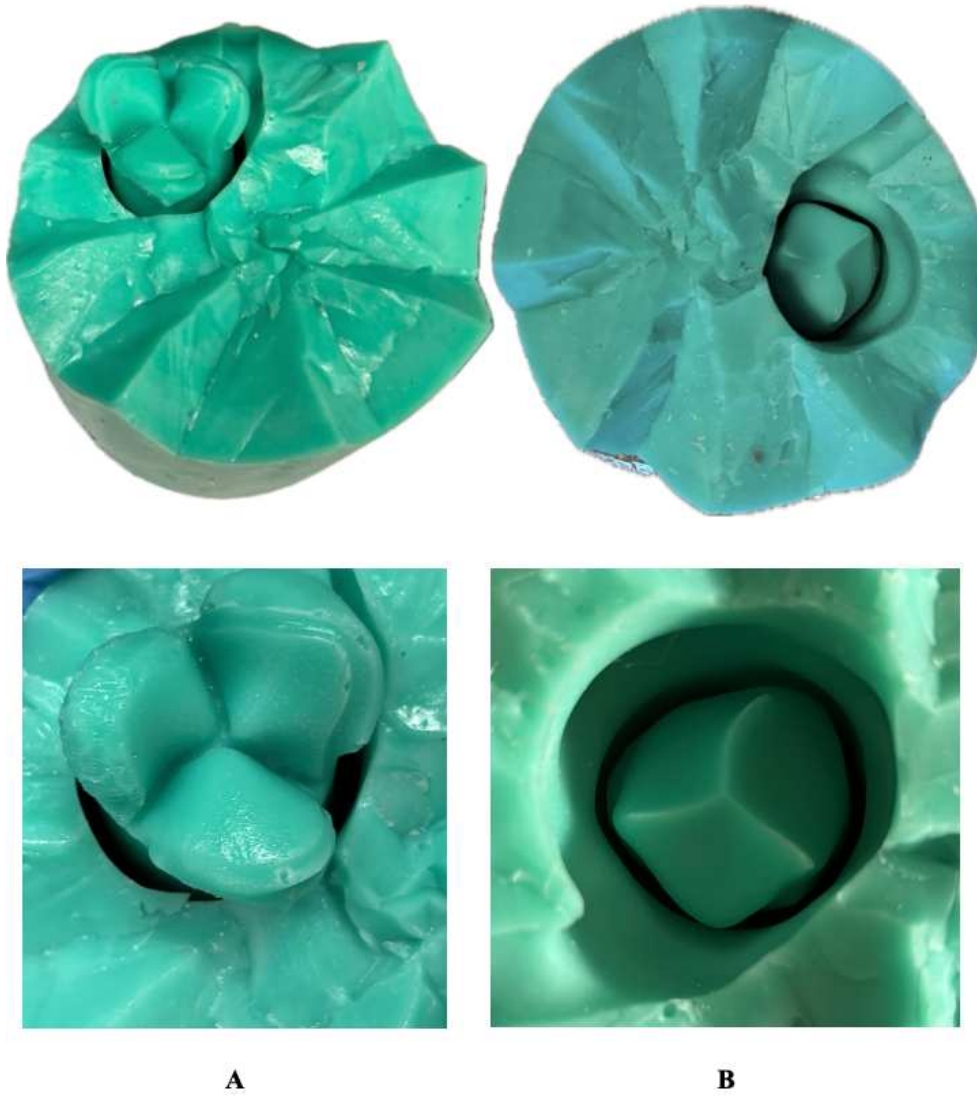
| *Mold Mold Star™* silicone open close to the aortic valve. (A) detail of the upper part of the mold; (B) detail of the lower part of the mold.
